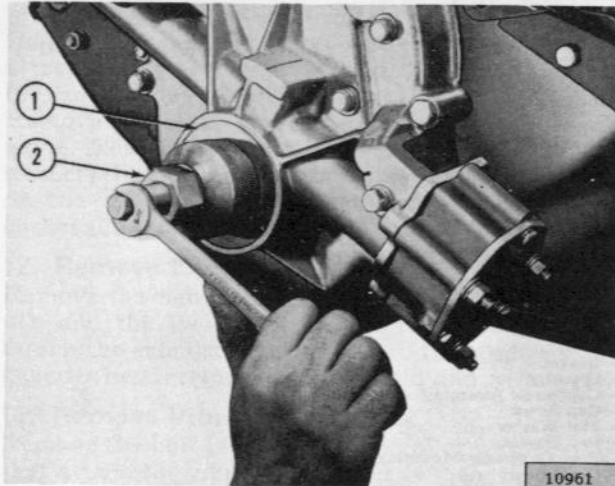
REMOVING FRONT CRANKSHAFT OIL SEAL
